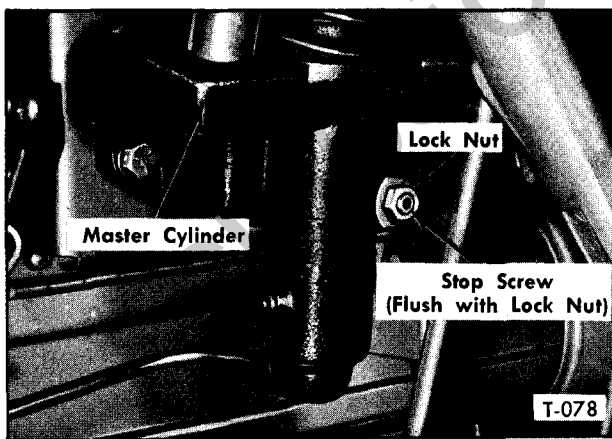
Clutch Master Cylinder Installed (Steel Tilt Cab Models, Except TM 80 and TV 70)
